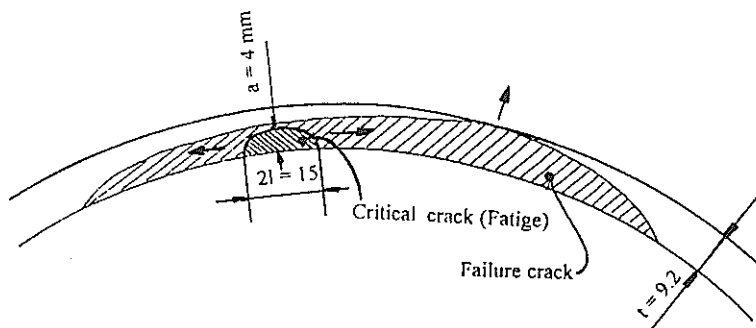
Actual Defect Geometry on Failure Condition of Pressurized Component.
